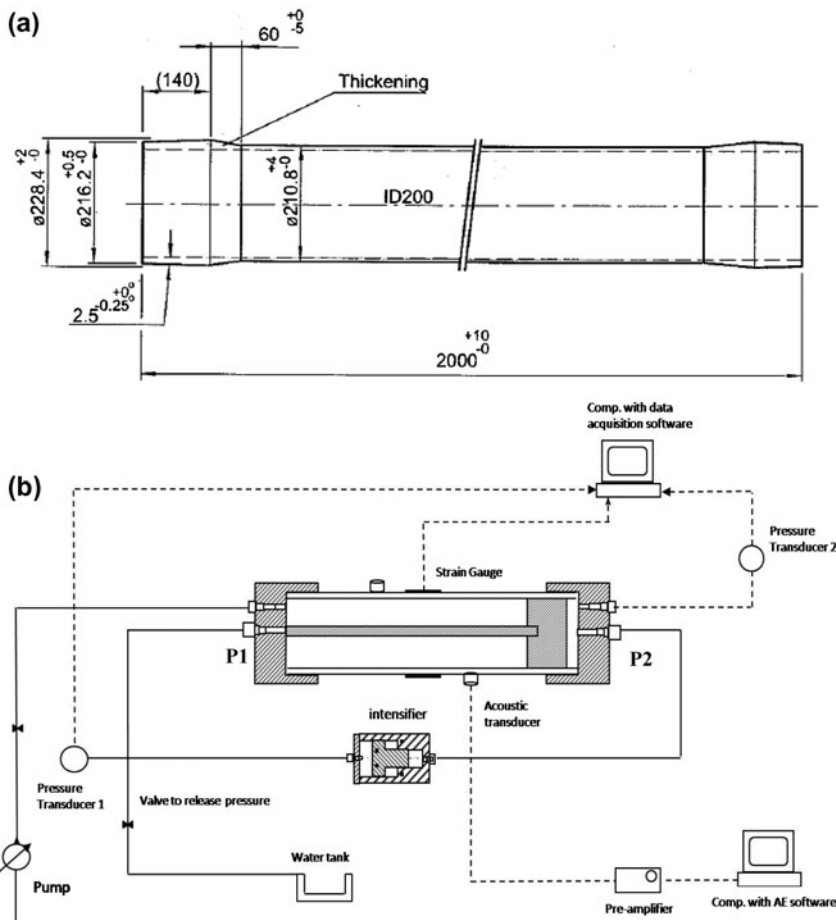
(a) dimensions (in mm) of the GRE pipe used in the UEWS tests and (b) schematic drawing of test rig for conducting UEWS test showing the set-up of acoustic sensors.
